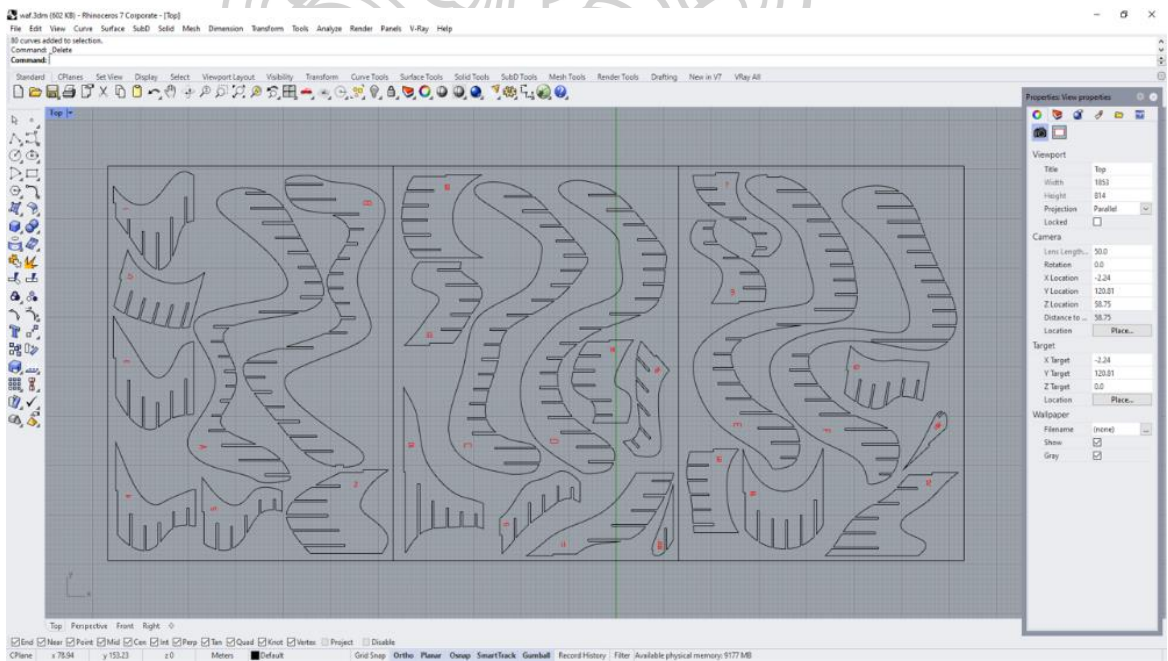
Example of Drawing and Numbering to send to the CNC machine.
